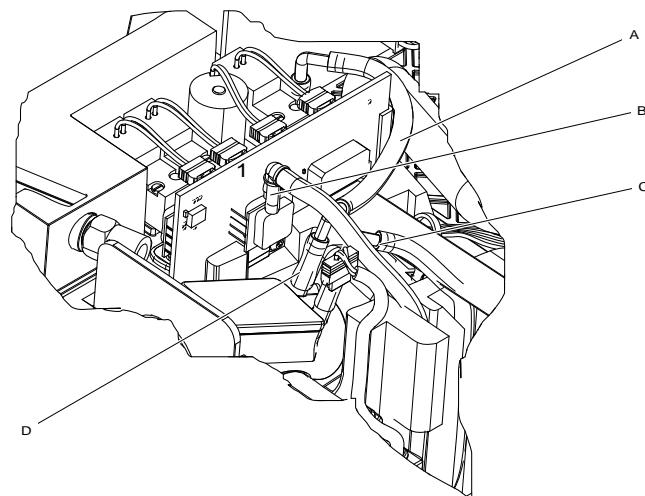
Pressure sensor assembly (HAMILTON-C1 < SN3643)
